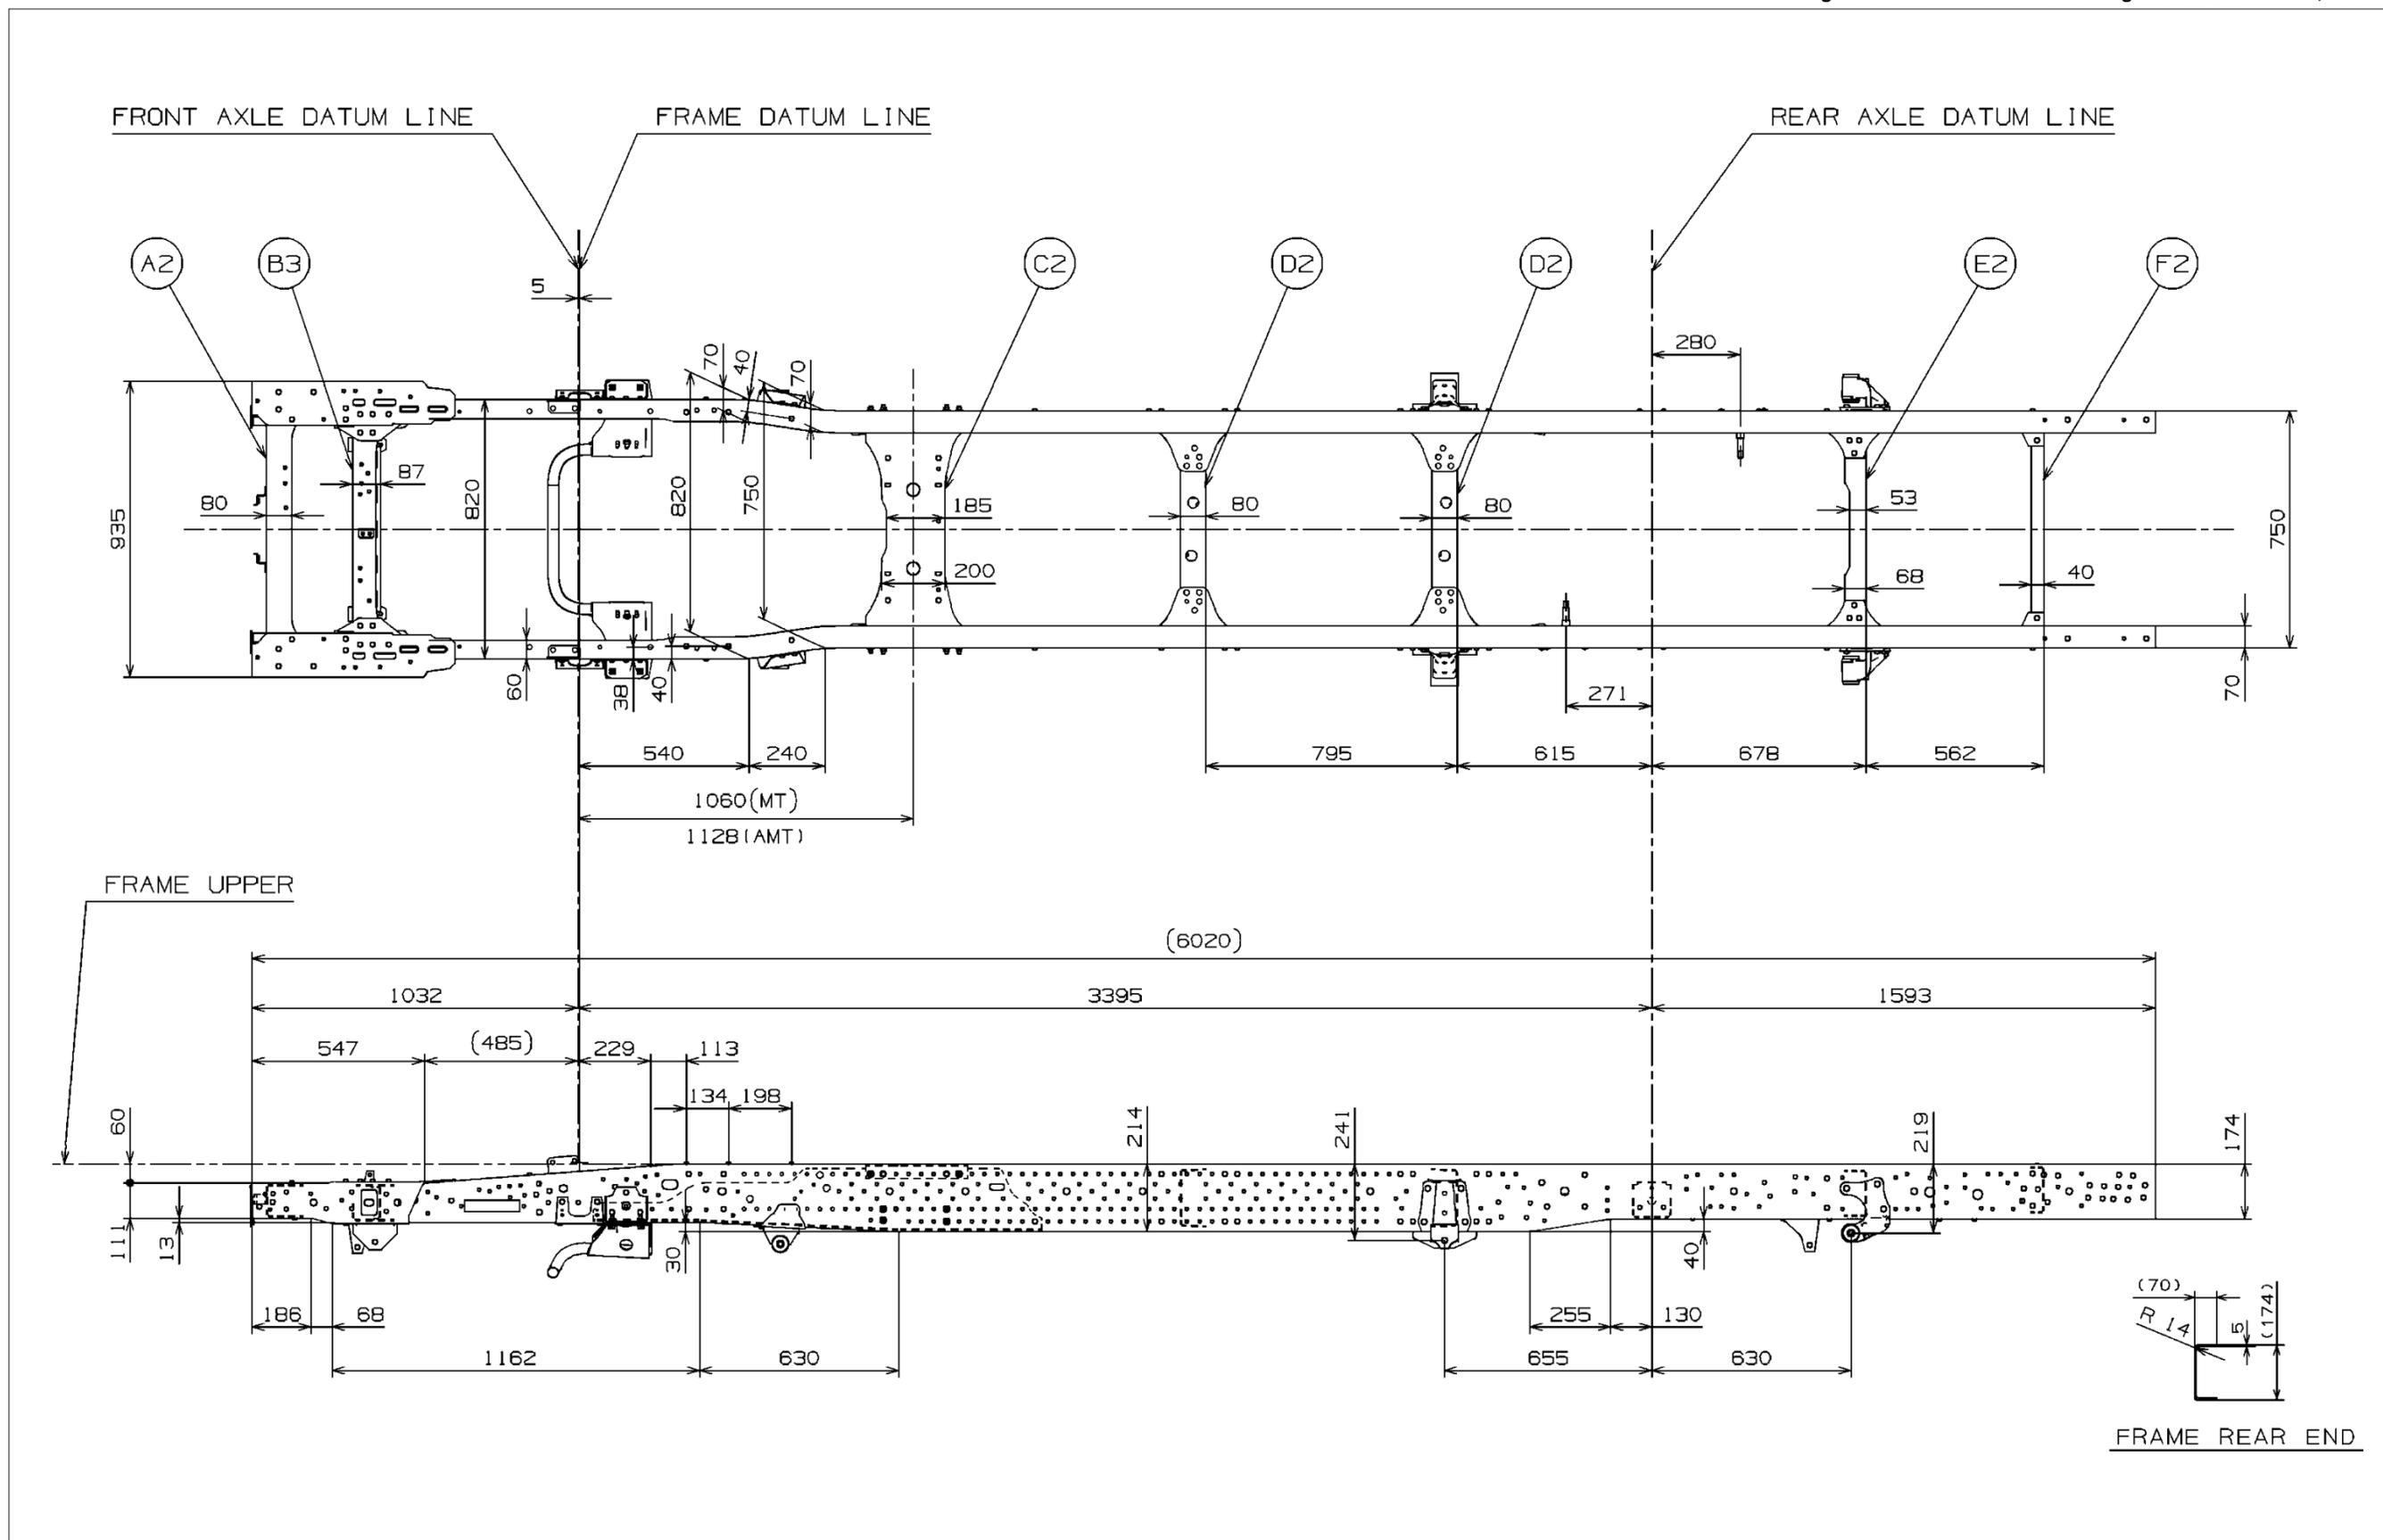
Chassis Frame Drawing NPR85L/U-HL5VAYE
